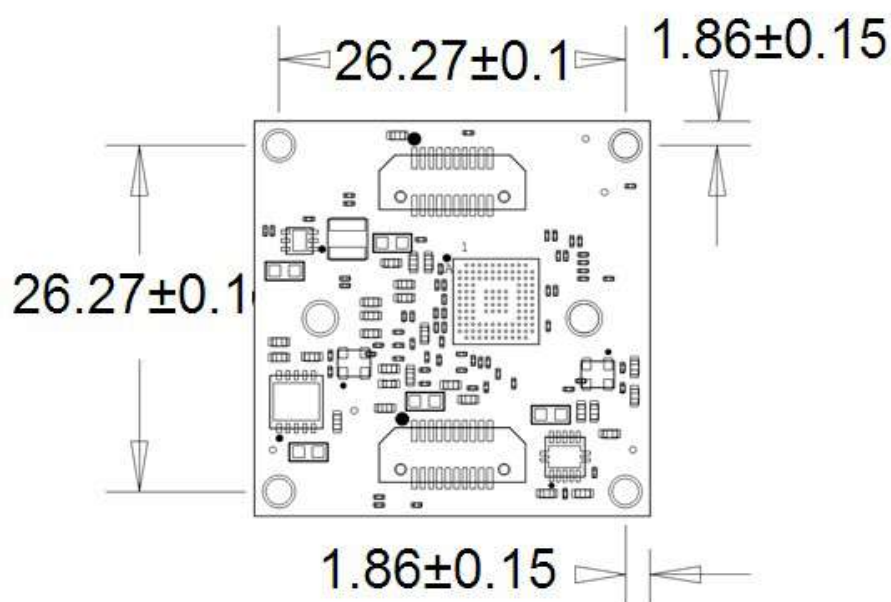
Rear Portion of See3CAM_CU135 Module Board Mechanical Dimensions
